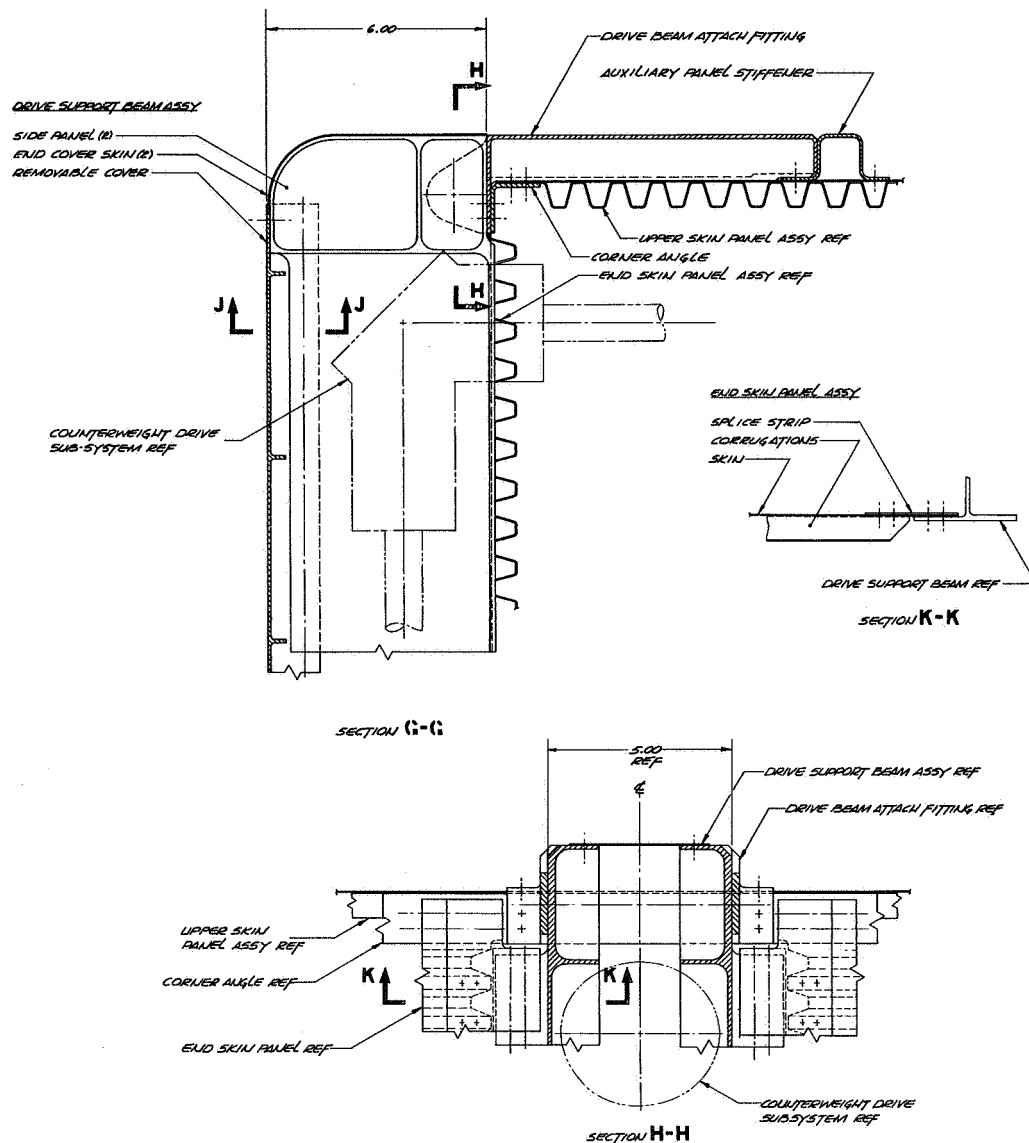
Main Rotational Frame and Arm/Counterweight Drive Structural Assembly.
